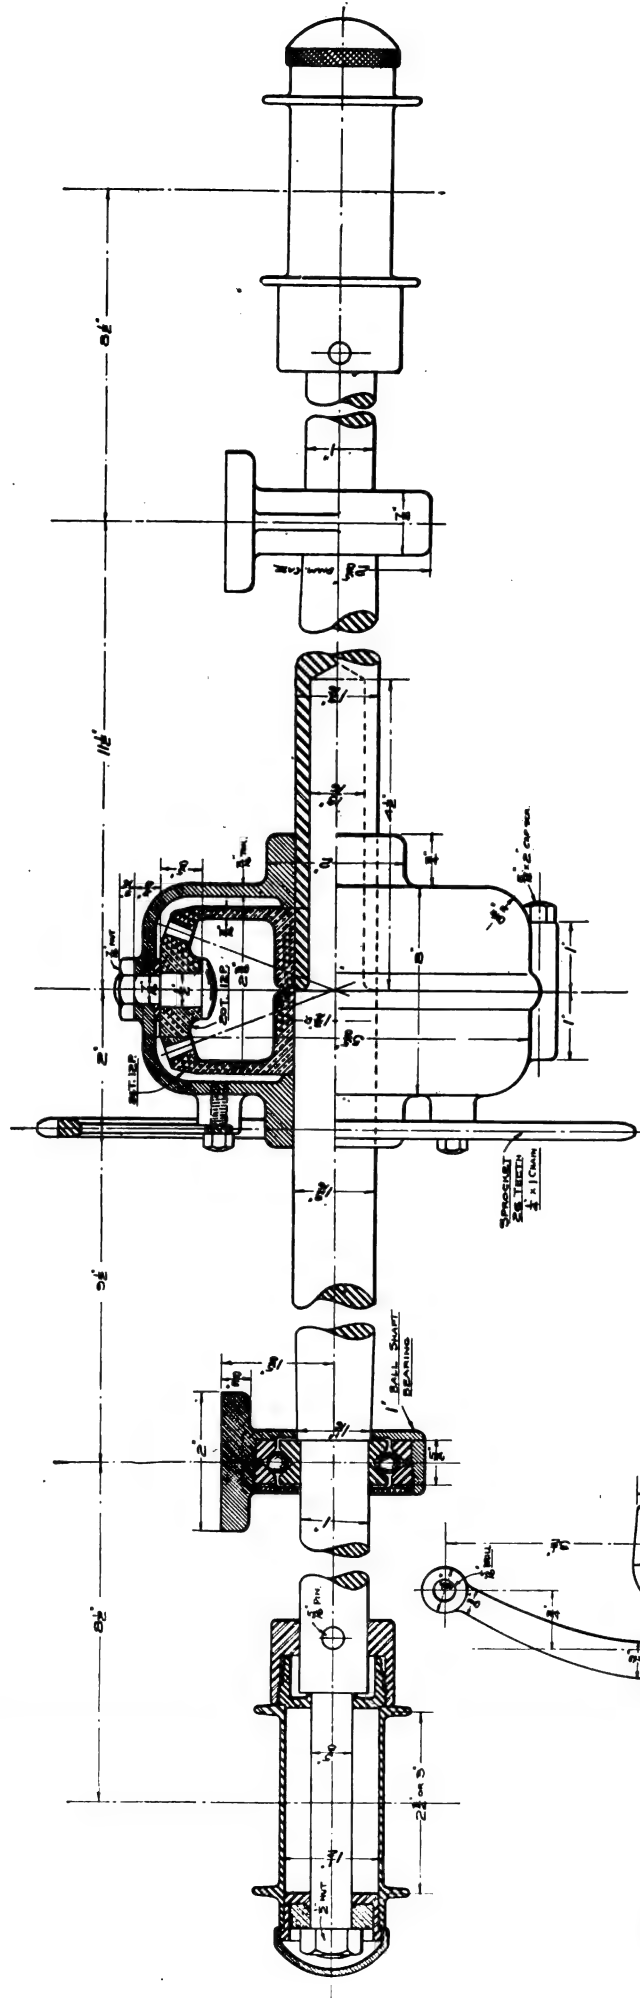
SEMI-SECTION OF REAR AXLE AND DIFFERENTIAL GEAR.
